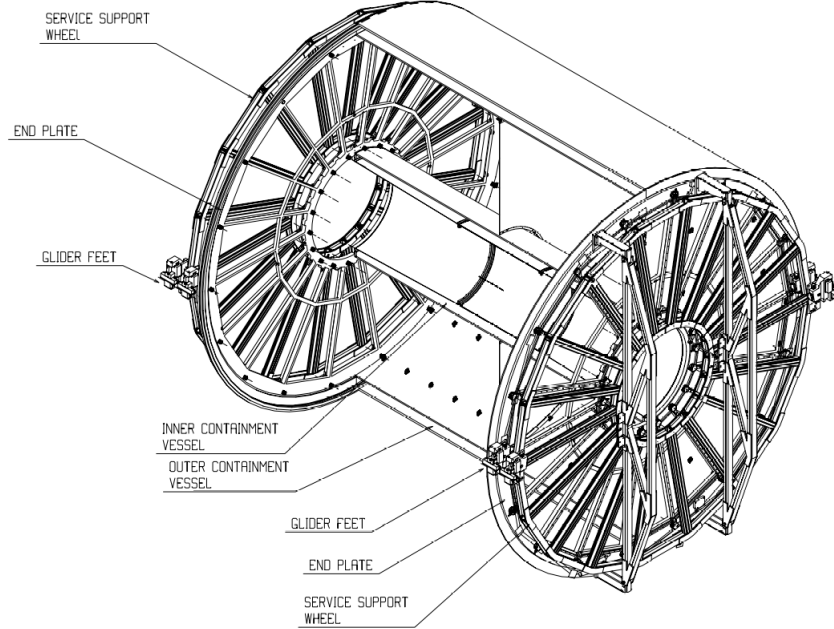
3D schematic layout of TPC[83]. The field cage and support wheel are displayed, and the reading chambers are to be installed at the end plate.
